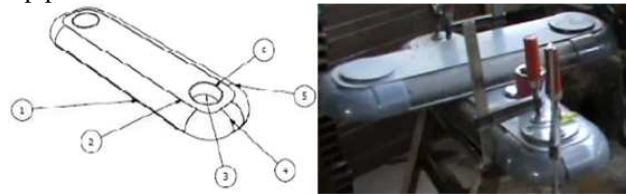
Buoyancy tanks made from PVC pipes and plates
